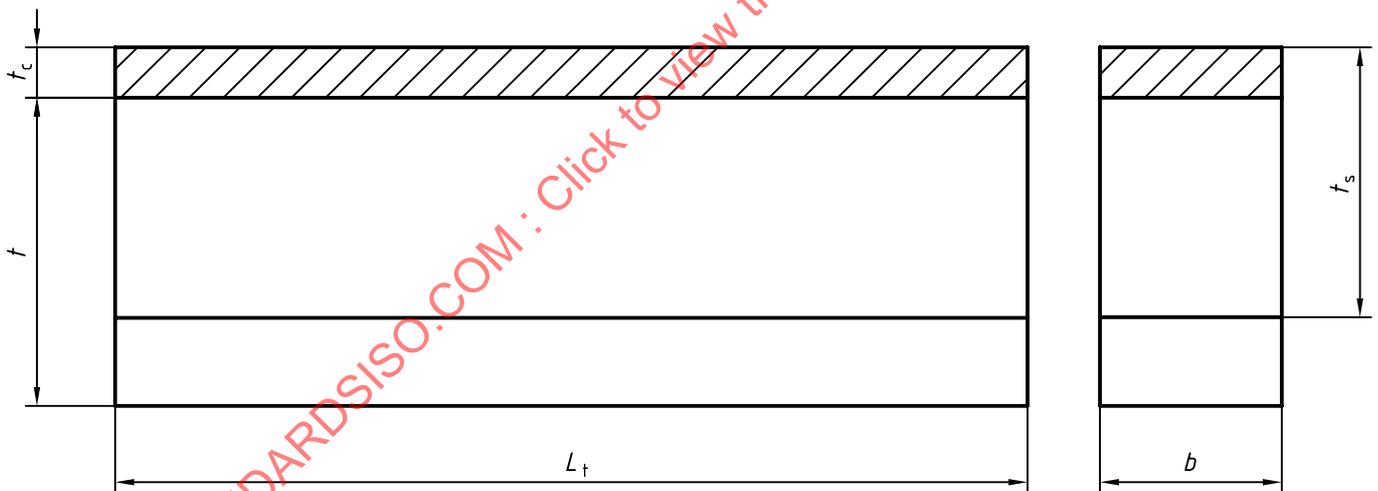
Face bend test specimen for cladding without a butt weld (FBC)
